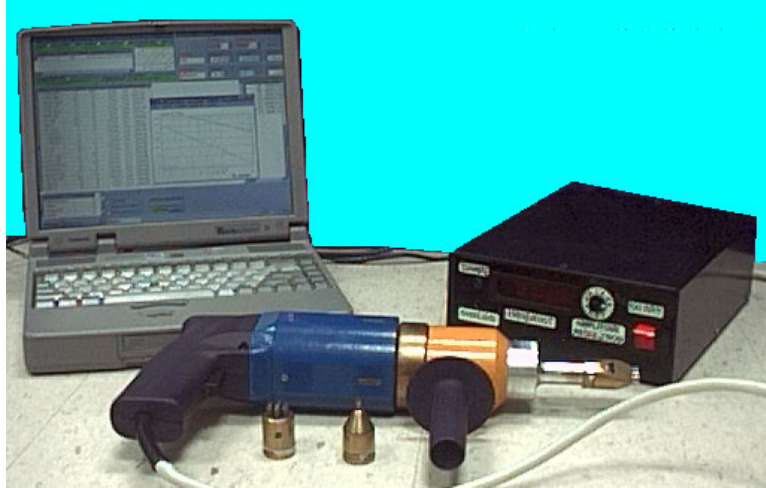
Computerized Complex for Ultrasonic Peening of parts and welded elements
